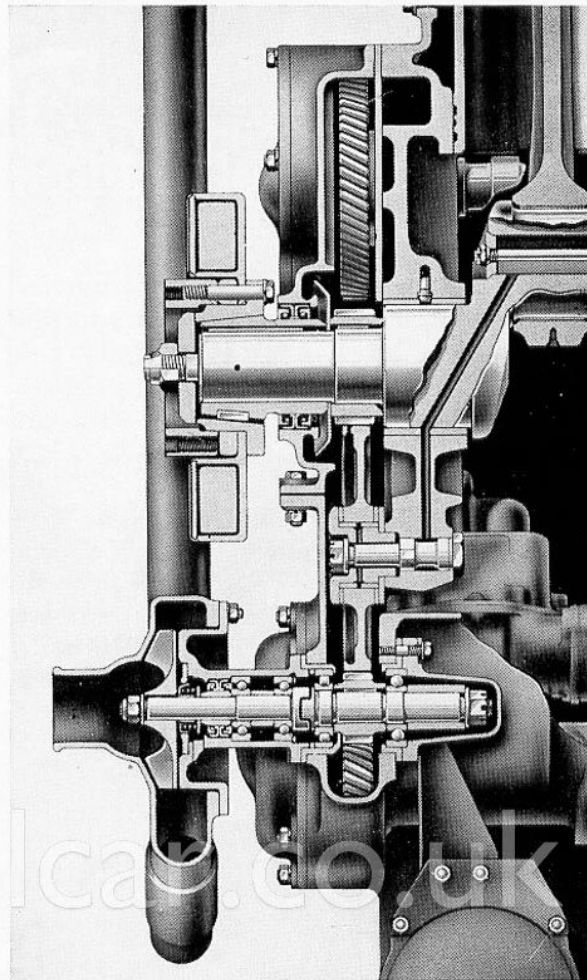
SECTION THROUGH FRONT OF HORIZONTAL ENGINE SHOWING TIMING GEARS
